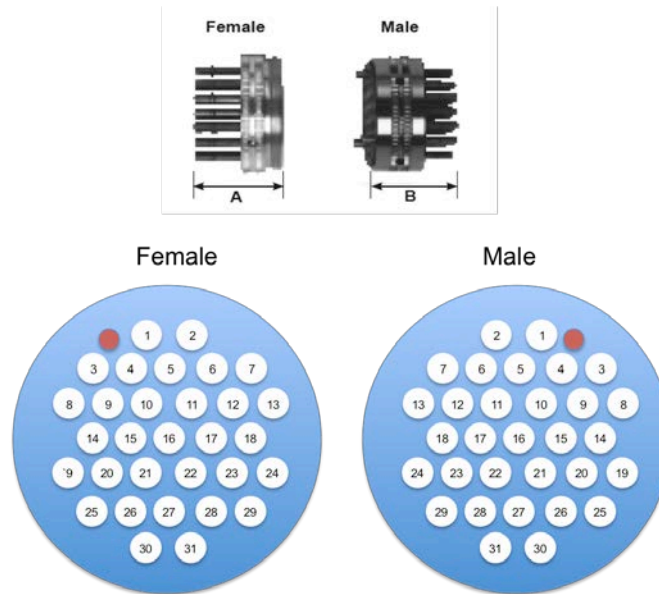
Scanivalve 31 Pin Pneumatic Connectors.
